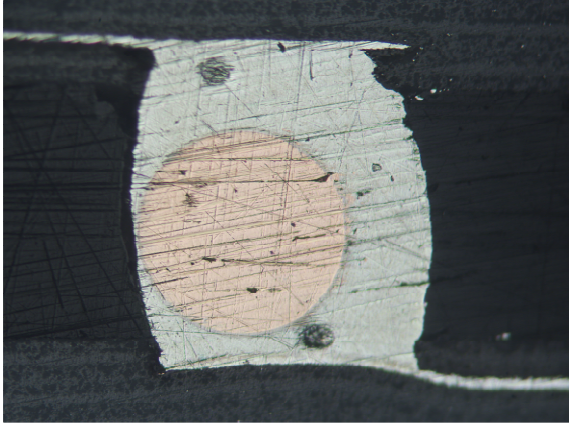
Micro sections of solder joints with copper-cored Senju Sparkle Ball C
